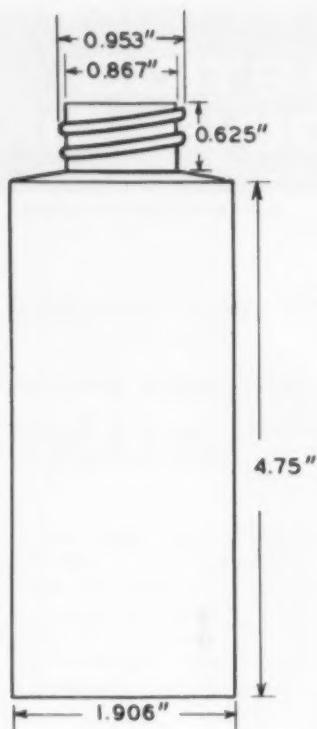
Shown here is sketch of inside surfaces of blow mold for 6-oz. bottle.
